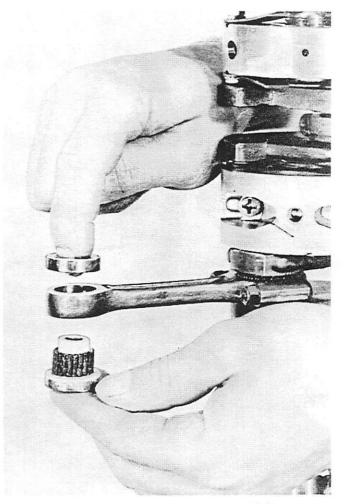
Inserting Piston Pin Bearings and Sleeve into Connecting Rod
